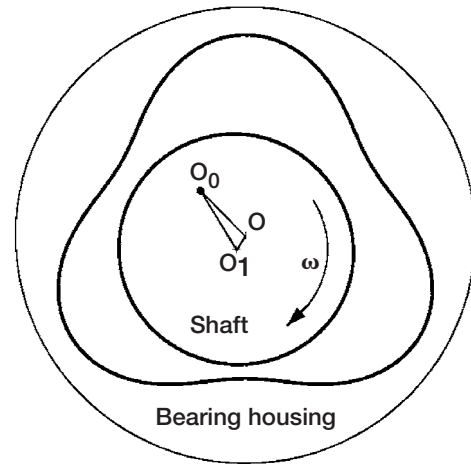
Cross section of three-wave journal bearing by horizontal plane.
